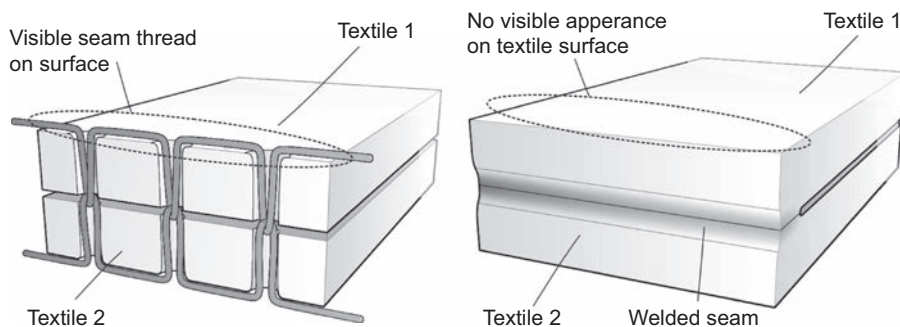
Schematic display of a lockstitch seam (left) and a welded seam (right).
